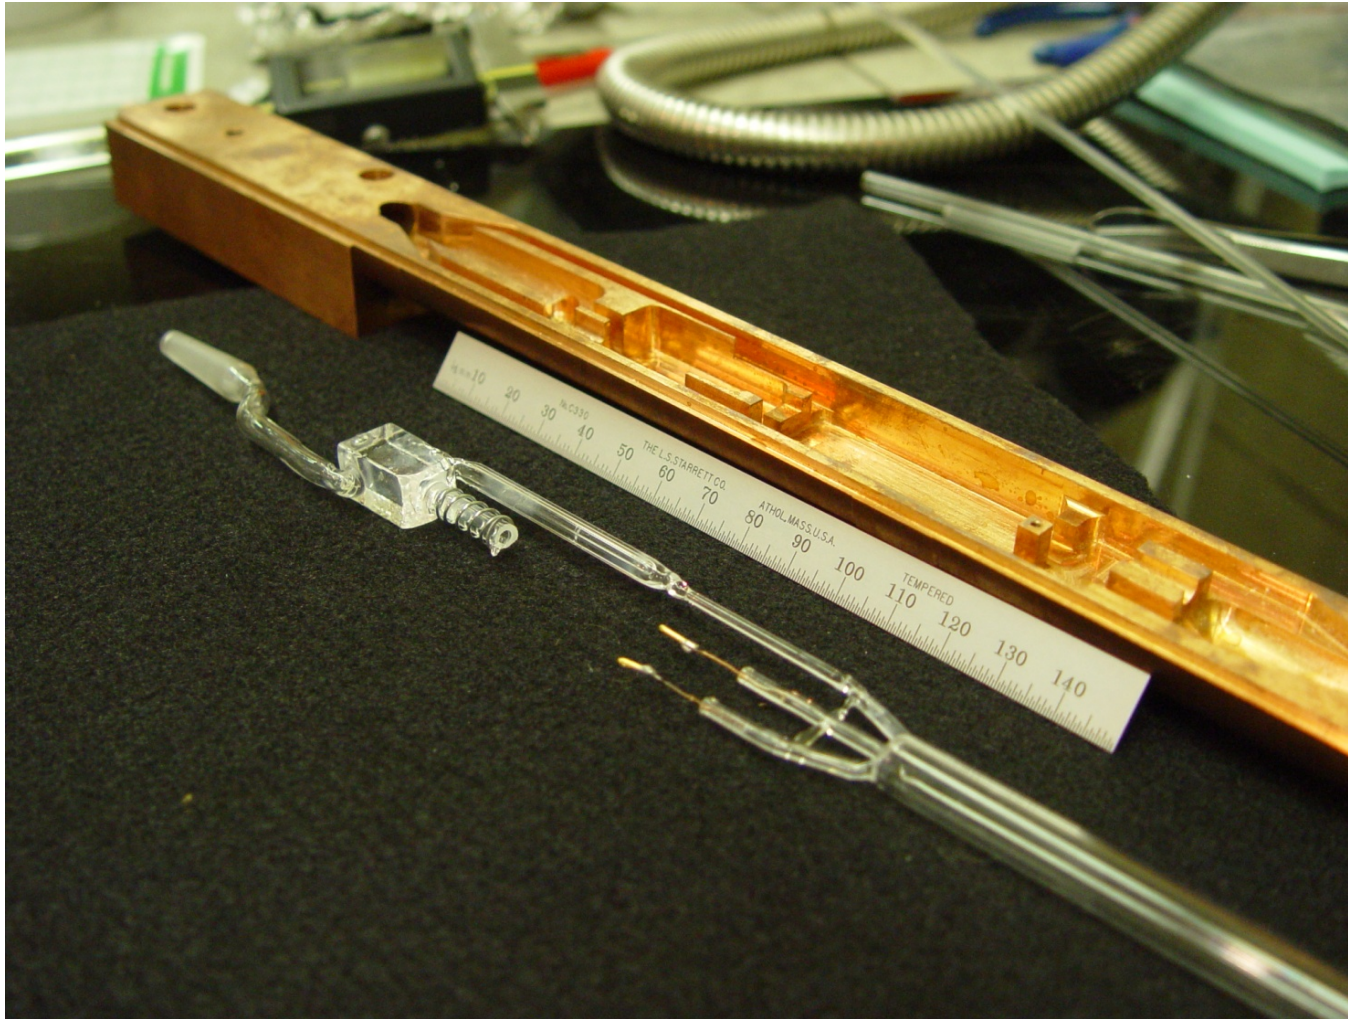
GPC mock up and Cu cradle. A mockup of a GPC is shown alongside a Cu cradle used to check the tolerances and fit of the GPC at each stage of the assembly process.
